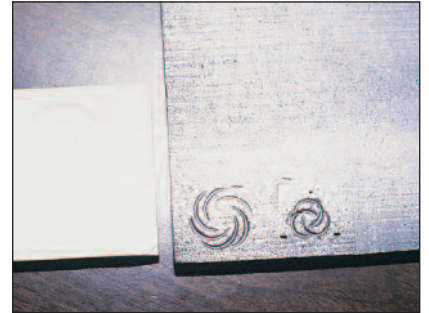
A soft fixture board. (Courtesy N. Krohn, Krohn Industries Inc.)
